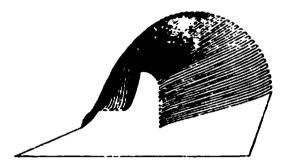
Cutter path for NC machining of the EDM electrode for the streamlined " T "-shape die.
